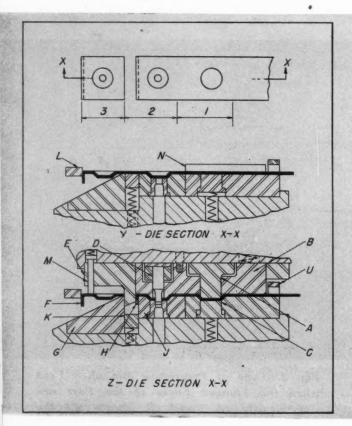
Three-stage Progressive Die for Forming, Punching, and Cutting off an Angular Part. It is Suited for Use with Automatic Feeding Devices, since it Insures Positive Part Disposal
